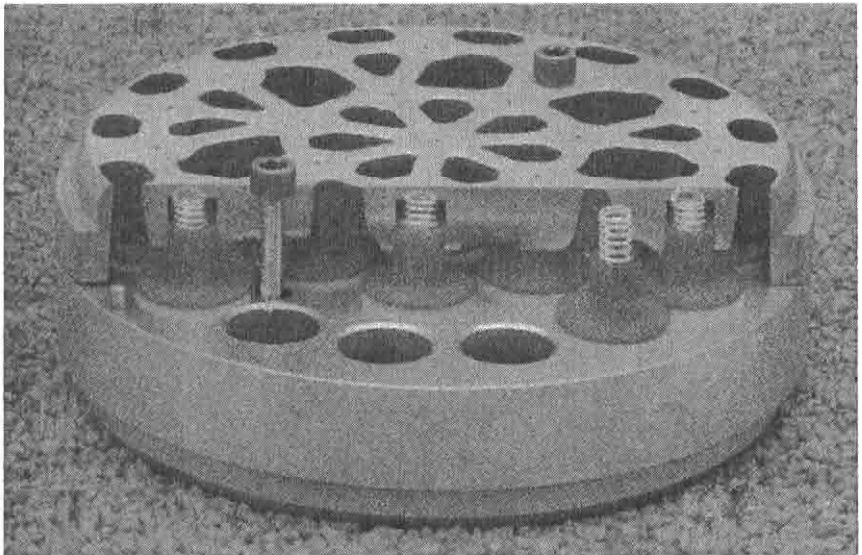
Exploded view of a concentric plate valve. (Courtesy of Dresser-Rand)
